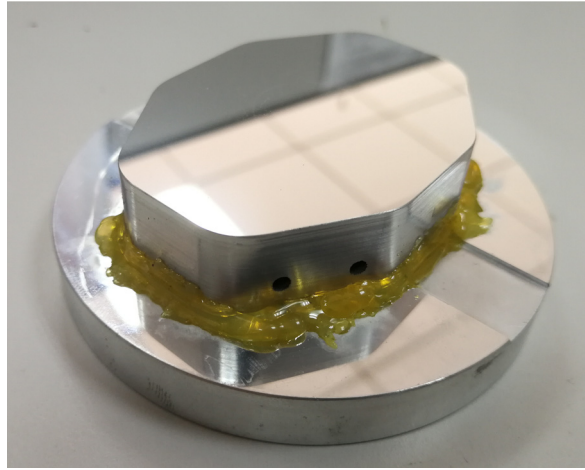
Additively manufactured metal mirror after SPDT machining.
